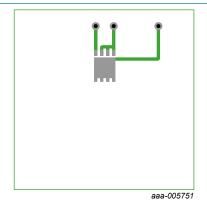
PCB layout for thermal resistance junction to ambient minimum footprint;FR4 board; 2oz copper
